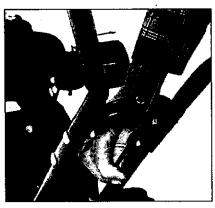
Remove the Forward Clutch Cable from the cable bracket.
